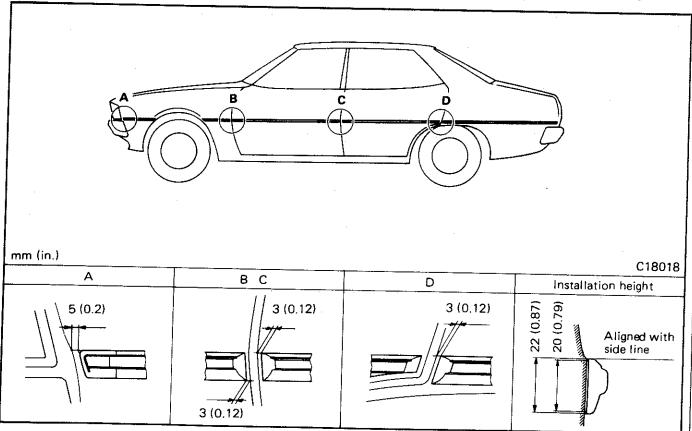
Standard position for installation of side mouldings (Sedan and Wagon)
